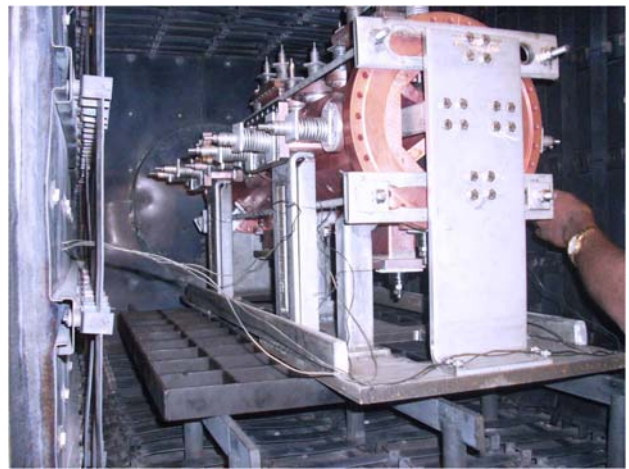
RFQ assembly with brazing fixture mounted inside the vacuum Furnace
